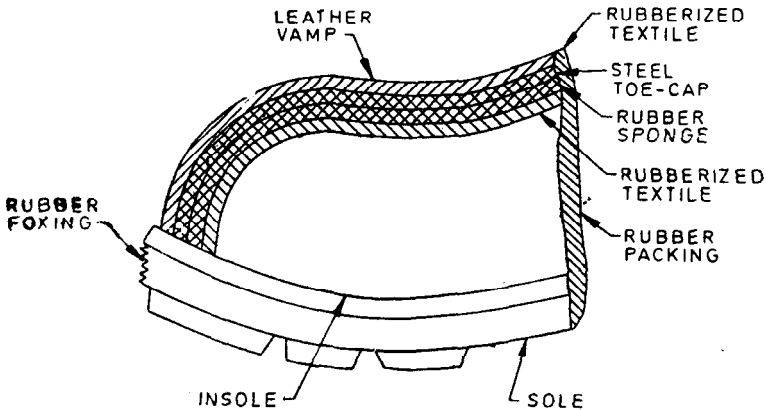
CROSS-SECTION OF TOE INCORPORATING STEEL TOE-CAP
